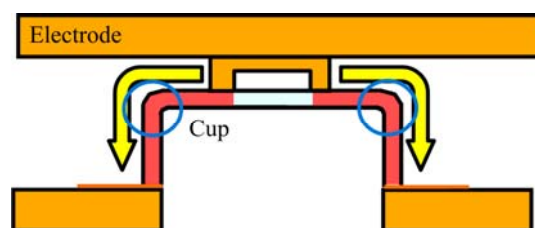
Resistance heating of side wall in hot spline forming of gear drum
